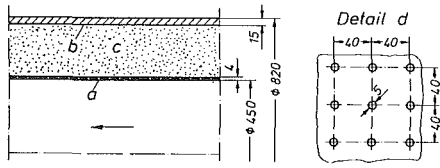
(a) Hot-air piping Coheiz: (a) perforated inner pipe; (b) pressure shroud; (c) insulation (mineral-wool); (d) detail of perforation of inner pipe; dimensions in mm
